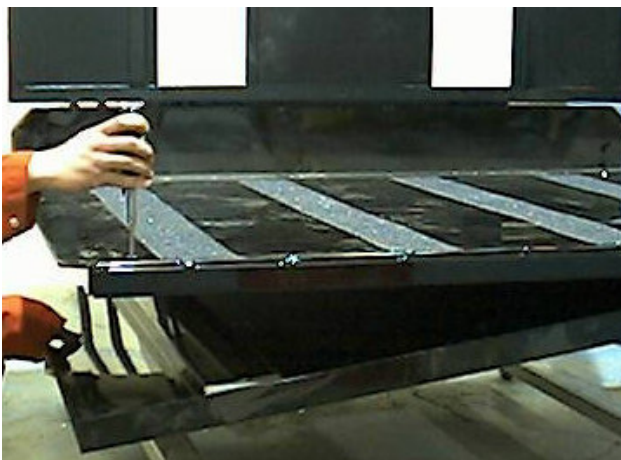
A- LOWER SAFTEY PAN TO ACCESS BOLT HOLES
